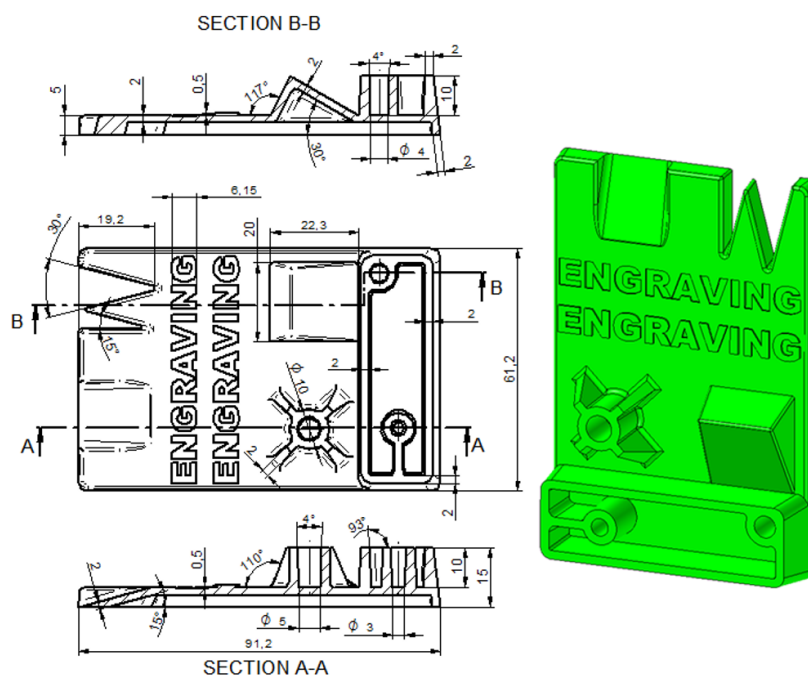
Dimensions and CAD model of the different geometrical features included in the part to be manufactured.
